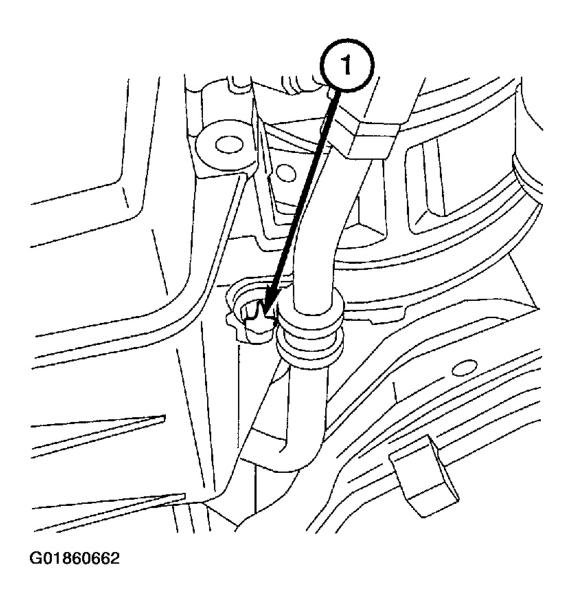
Removing Transmission Oil Cooler Line Retainer Bolts Courtesy of DAIMLERCHRYSLER CORP.
